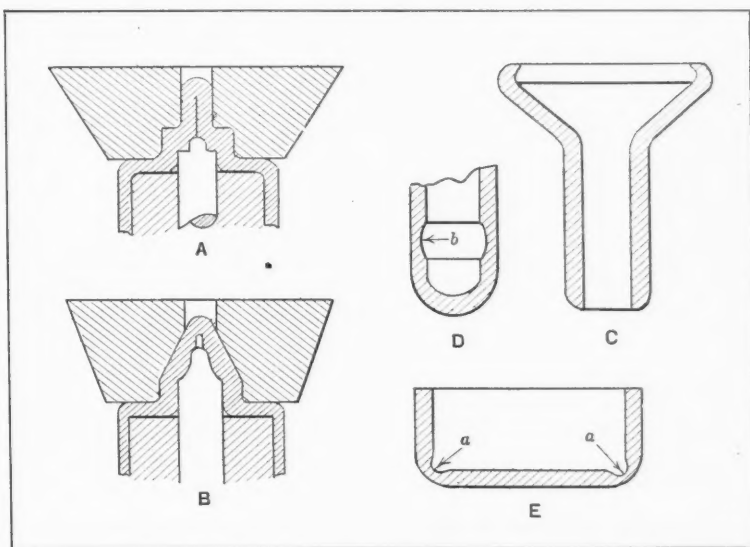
Diagrams Illustrating Important Points in the Design of Drawing and Coning Dies
